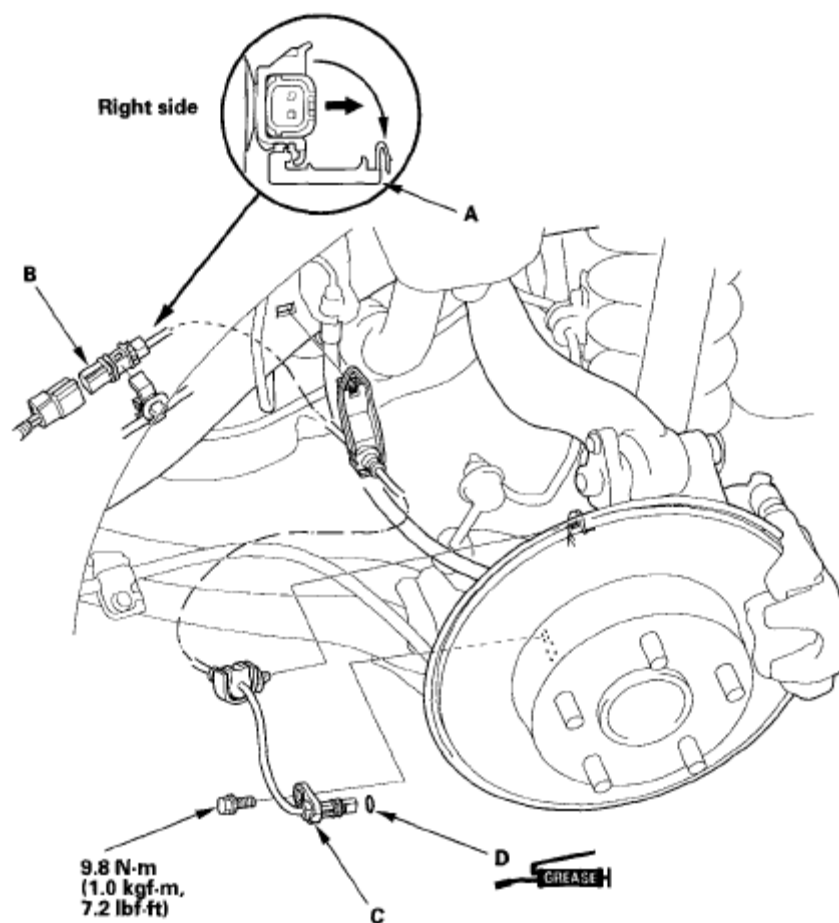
Identifying Wheel Speed Sensor Connector (Rear) (With Torque Specifications)
